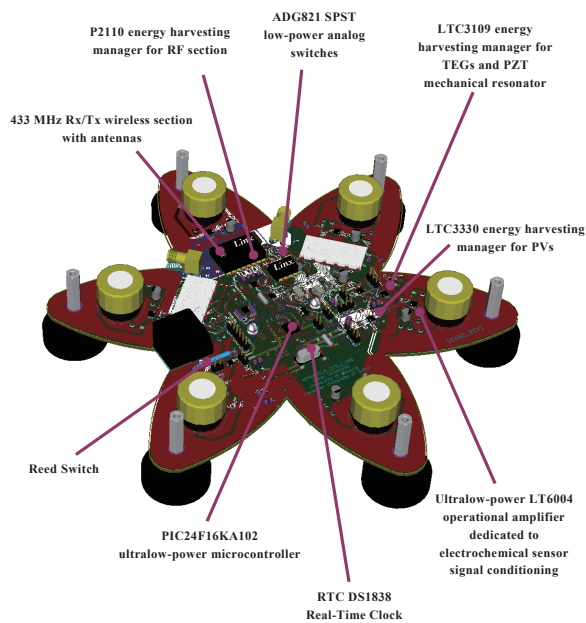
(Color online) 3D view of SENNO (PCB bottom view) where functional blocks are illustrated.
